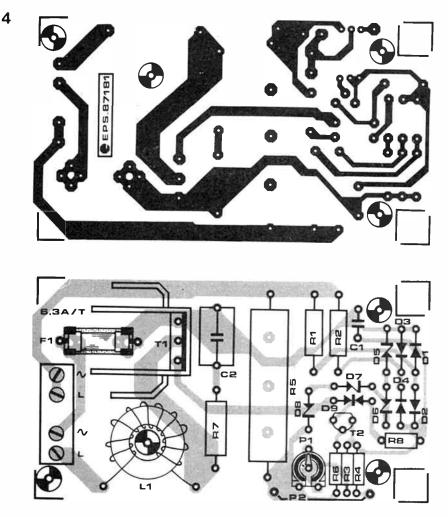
Track layout and component mounting plan for the dimmer PCB.
